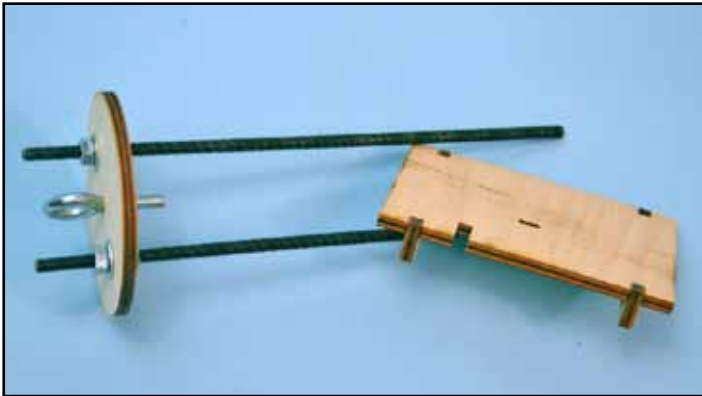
Assemble the e-bay sled so that you can hold the threaded rods at the correct distance apart.
